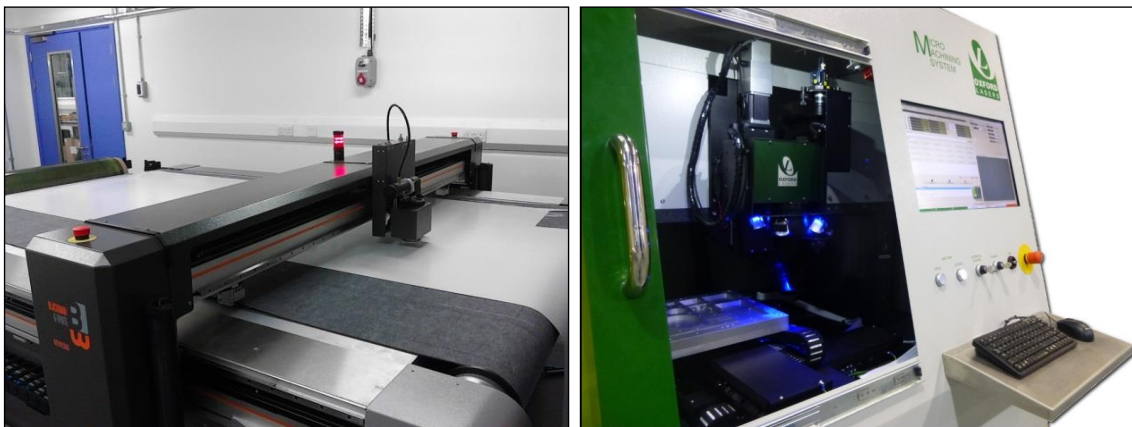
Automated conveyORIZED cutter (left) and laser milling unit (right).
